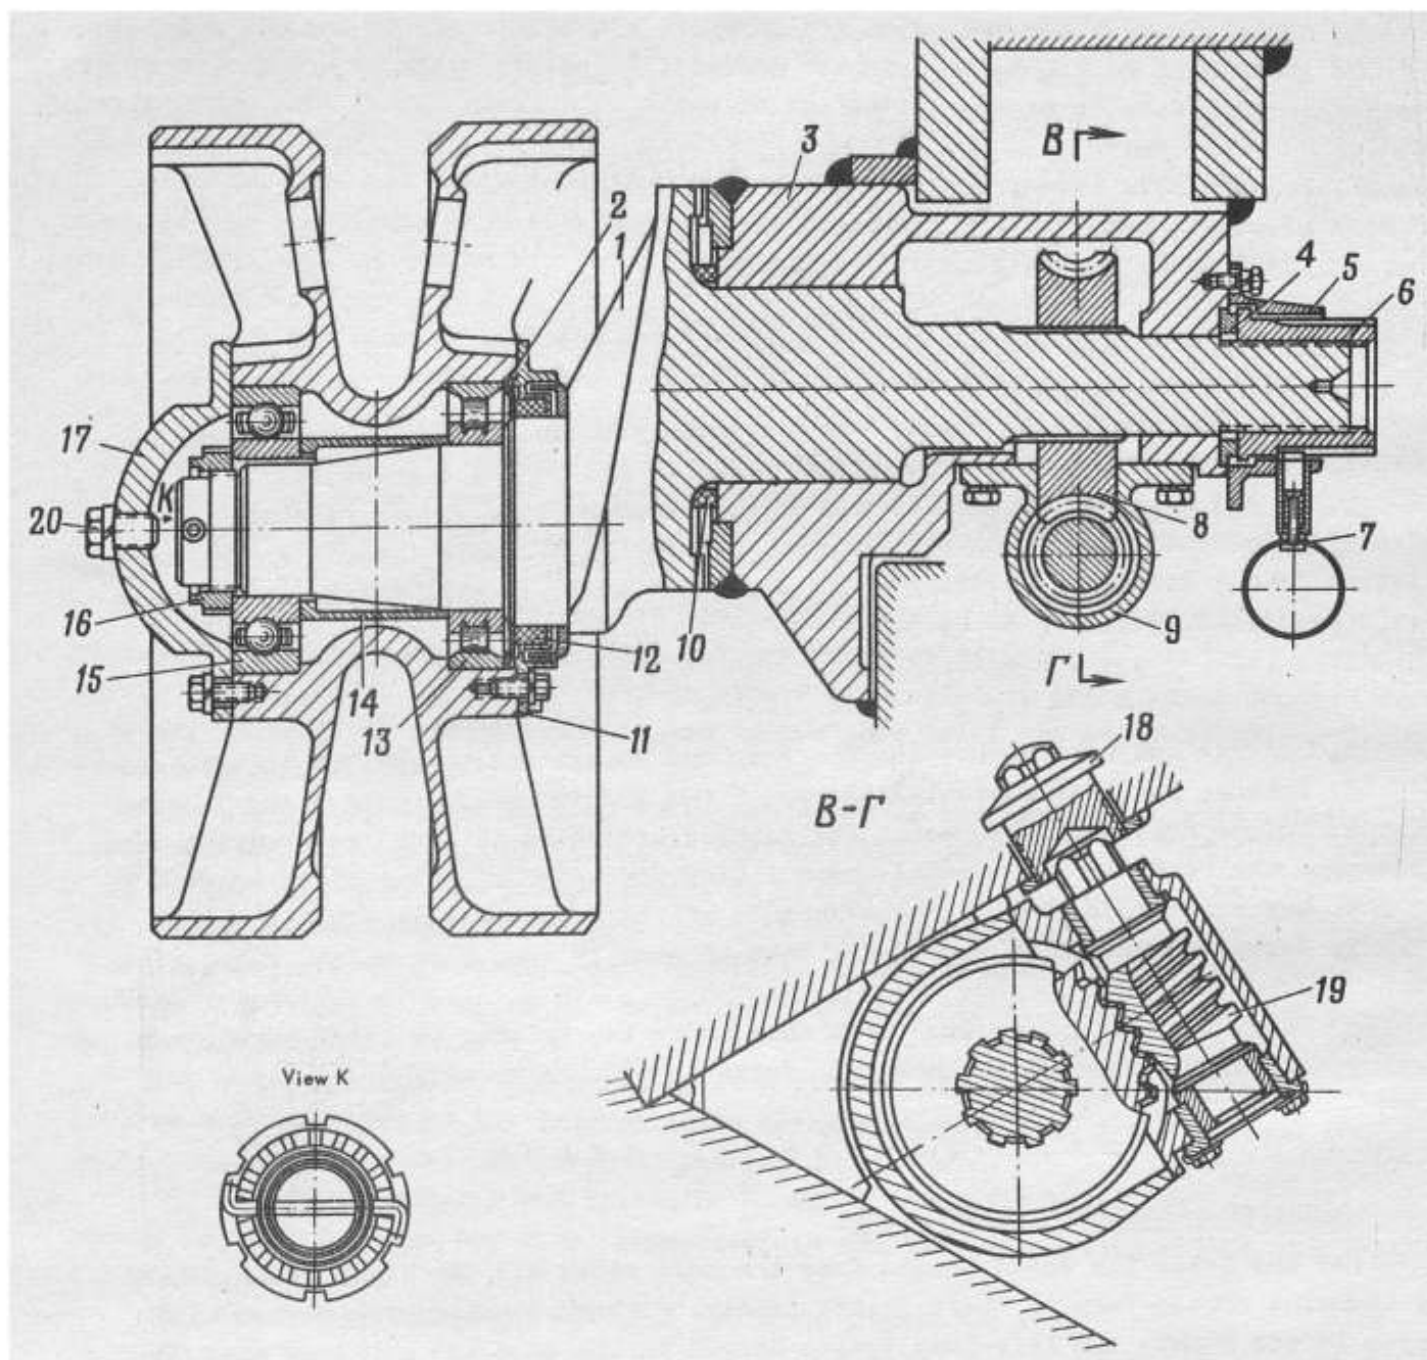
IDLER WHEEL AND TRACK ADJUSTING MECHANISM
